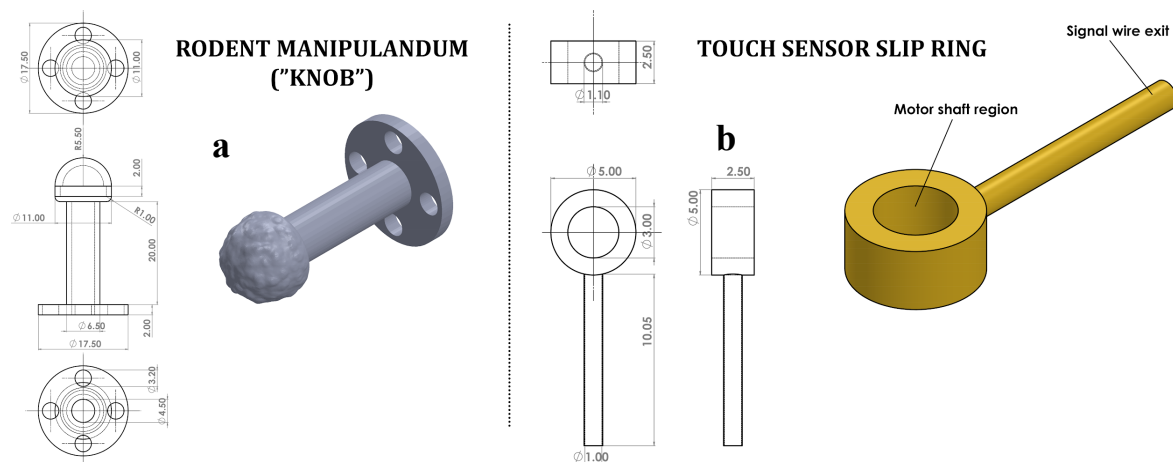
3D models of the manipulandum and touch sensor slip ring. a) A 3D rendering of the manipulandum (“knob”) was shown alongside three different 2D views. The knob end is 11mm in diameter, and the shaft is 2cm in length. The manipulandum was fabricated using selective laser-sintered aluminum. b) A 3D rendering of the slip ring, used to electrically connect the manipulandum to a touch sensor, is shown alongside several 2D renderings. The slip ring was specially constructed by the Emory University machine shop out of machined brass.
